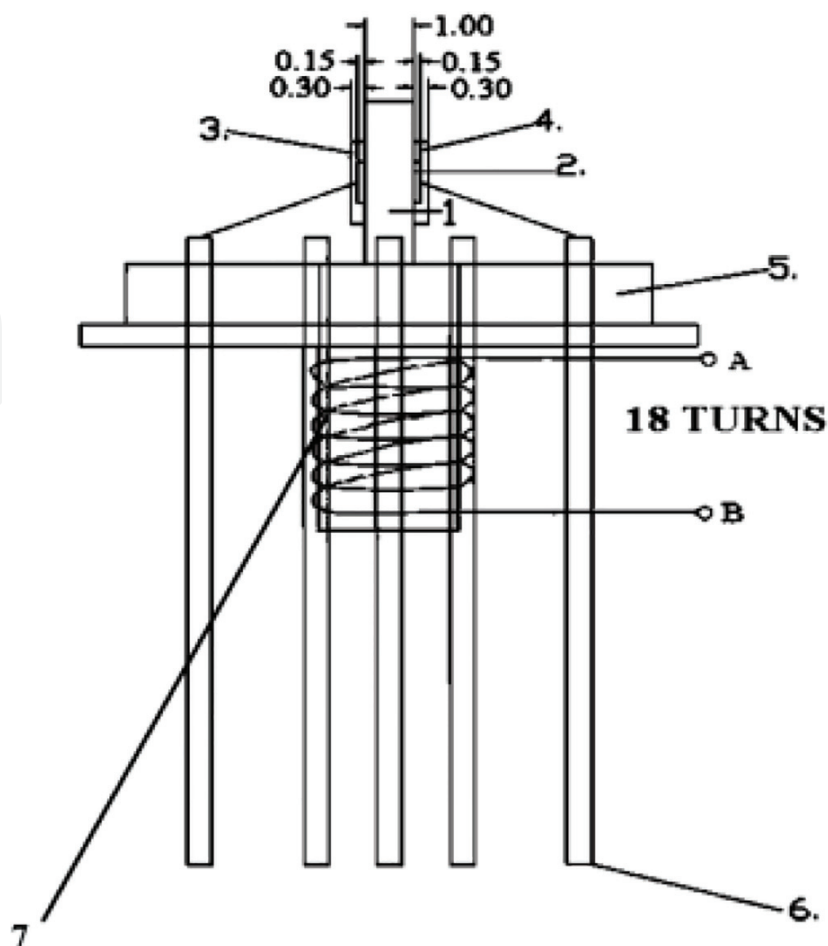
CO₂ sensor, component parts: 1. Ce₂O₃-Y₂O₃ disc; 2. Gold electrode, thin film deposition of Au, in the form of the disc; 3. Ag micro-wire connections; 4. The positioning piece; 5. TO-8 package plated base; 6. The pins; 7. A, B terminals of 18 turns heating resistance.
